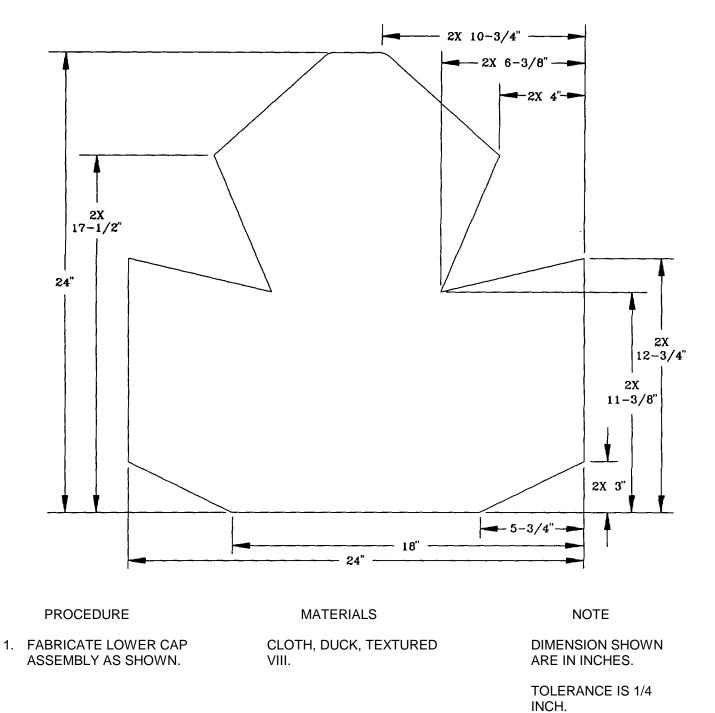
(Container Side Mounted) Lower Cap Assembly (Sheet 1 of 2)
